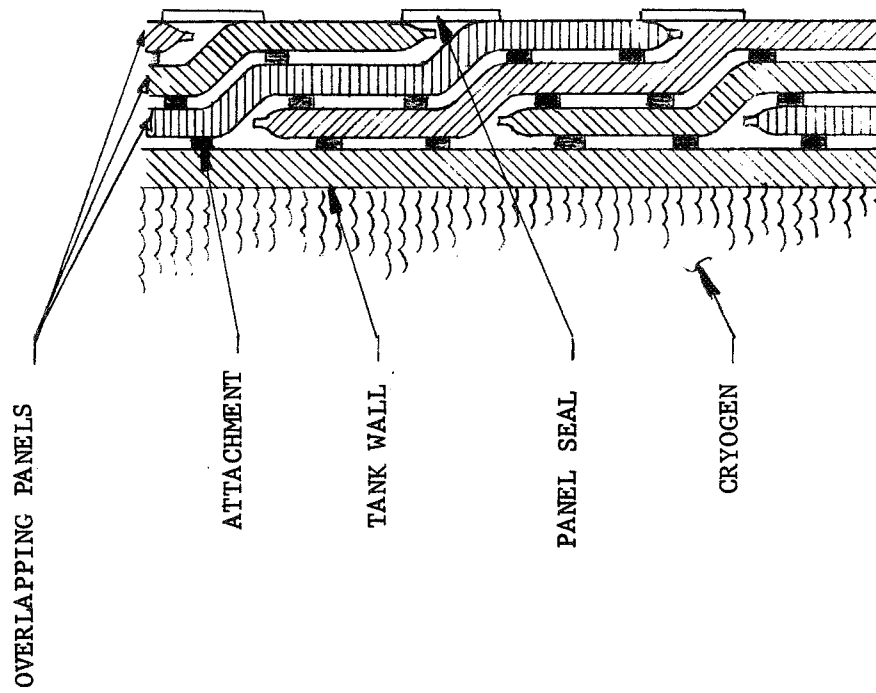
SEMI PANEL SHINGLE ARRANGEMENT INSTALLATION
